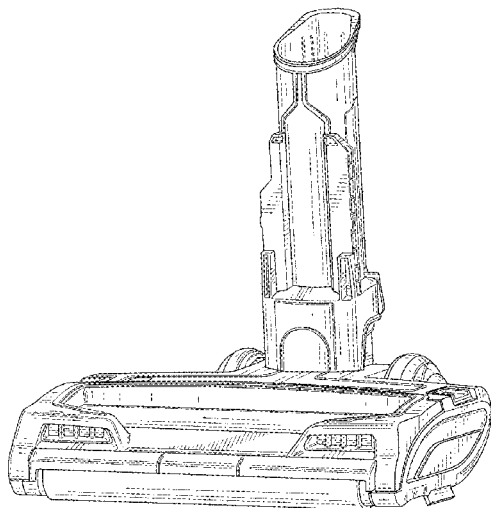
is a perspective view of a surface cleaning head with dual rollers showing our new design;
